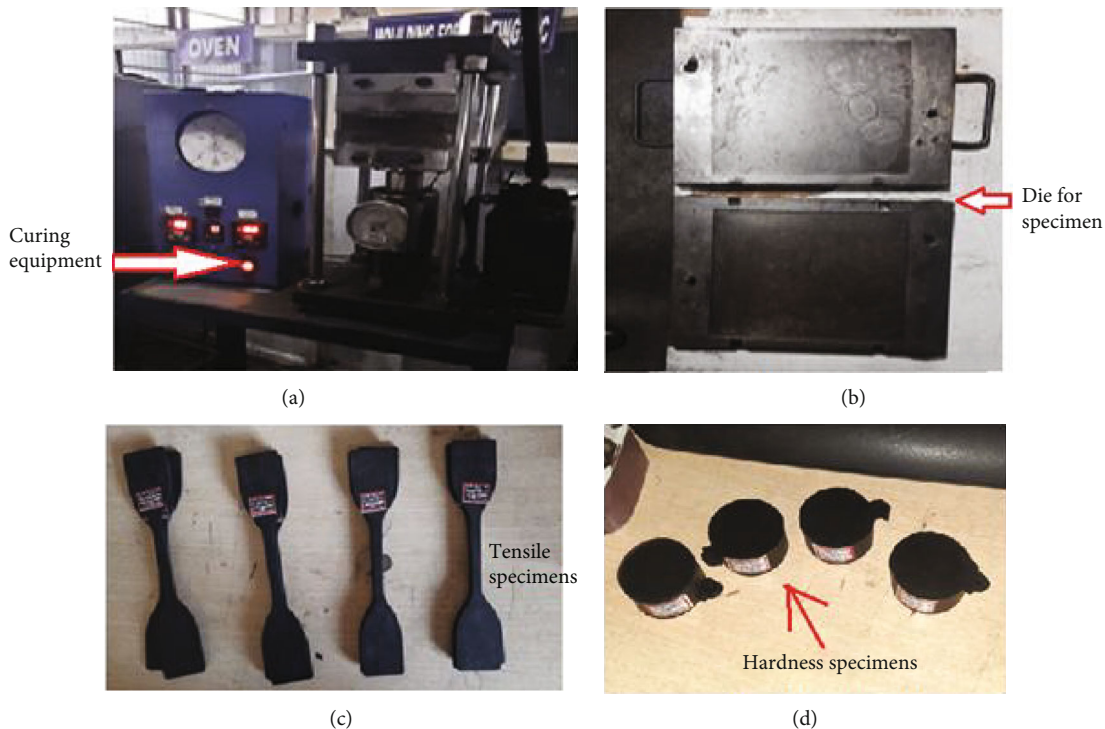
(a) Curing equipment. (b) Die set. (c) Tensile specimens. (d) Hardness specimens.
